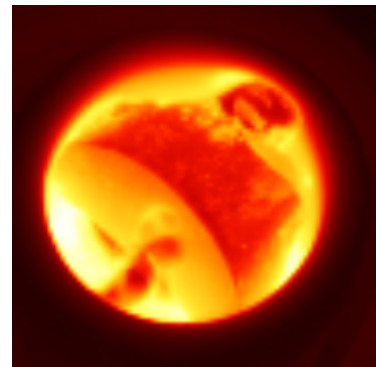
IR image of welded alloy melt behaviour, billet top piece turning
